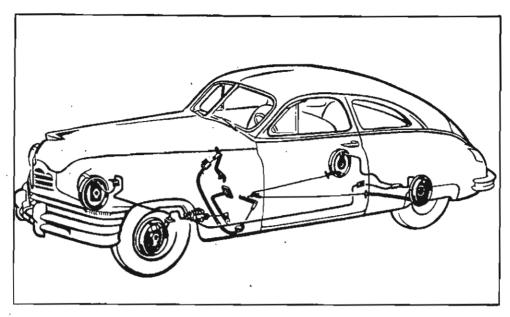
Mechanical Hand or Parking Brakes Affect the Rear Wheels Only.
